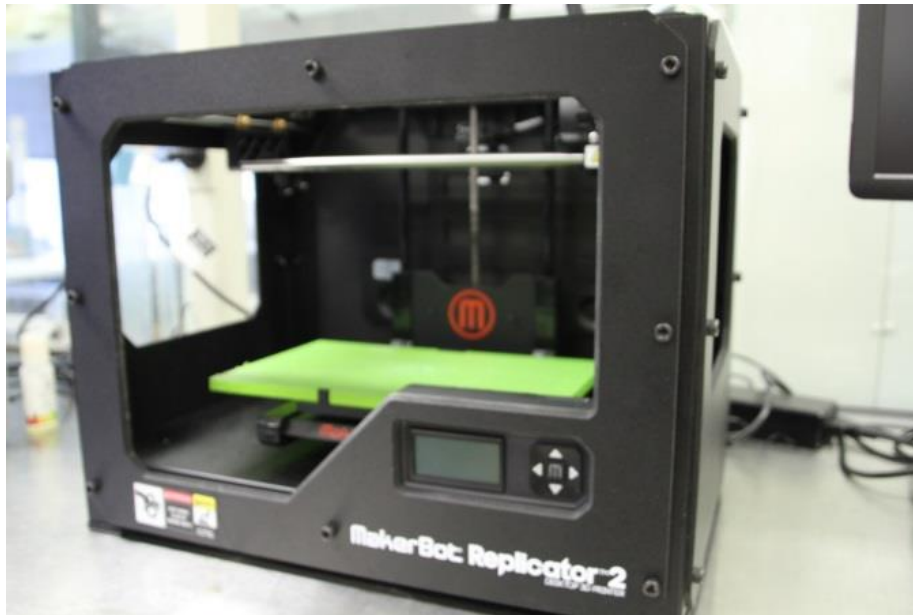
Illustration of FDM equipment for prototyping (Makerbot Replicator, Brooklyn, NY, USA)
